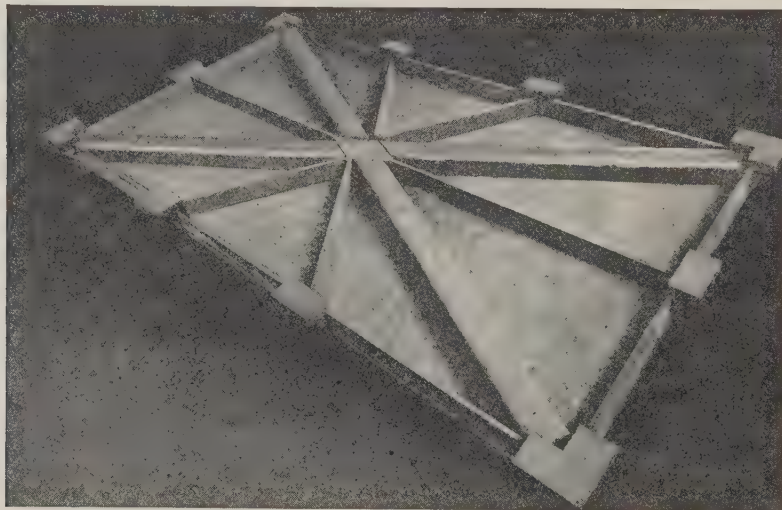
STIFFENER ARRANGEMENT ON UNDERSIDE OF MACHINE BED
